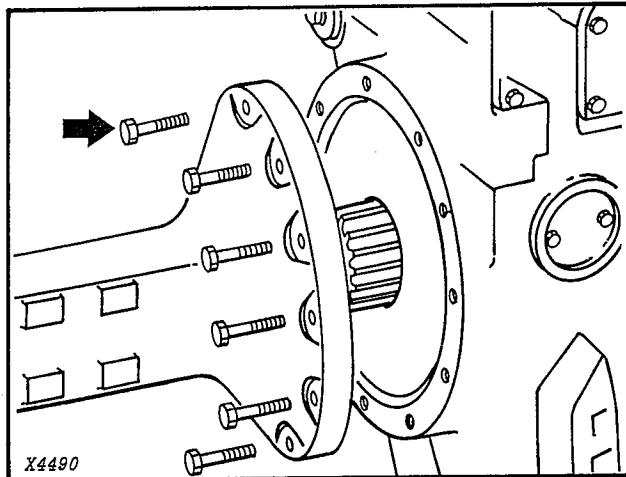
When Fasteners are Removed, the Assemblies Can Be Separated into Individual Components
